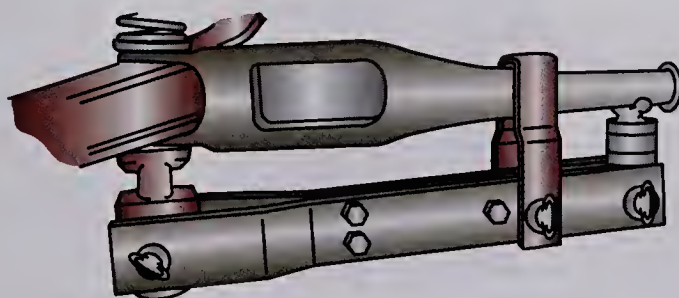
Hydraulic jack and bending tool positioned on the radius rod to increase positive caster on a twin I-beam front suspension.
